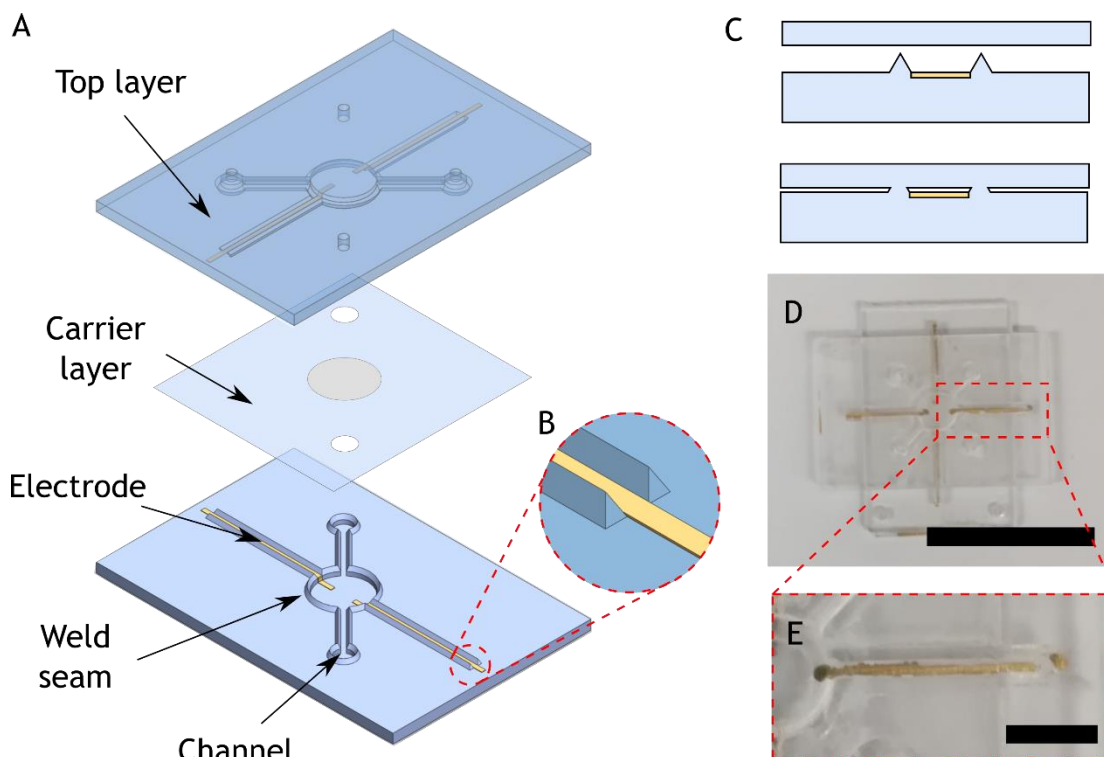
Electrode channels to protect the electrodes during welding. A shows an exploded view of a chip with the weld seams and electrode channels. A close up of the electrode channel is shown in B. C shows a schematic of the electrode channel both before and after welding. The small gap in the channel was sealed with a small quantity of glue. D shows a photograph of an assembled chip with a close-up of an intact electrode shown in E. Scale bars = 25 mm in D and 5 mm in E.
